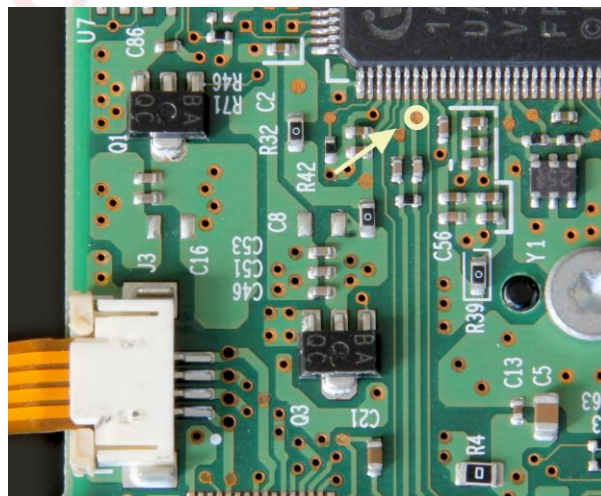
Location where the probe should be connected to unlock a HDD.
